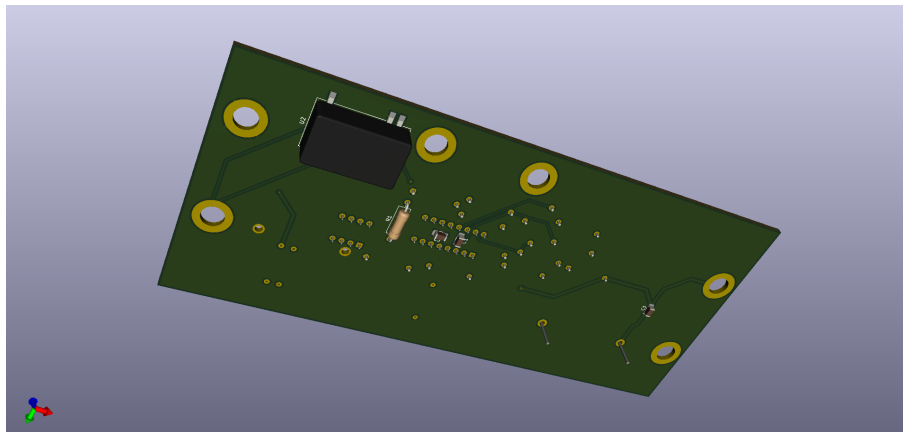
3-D View of the PCB, Bottom Layer
